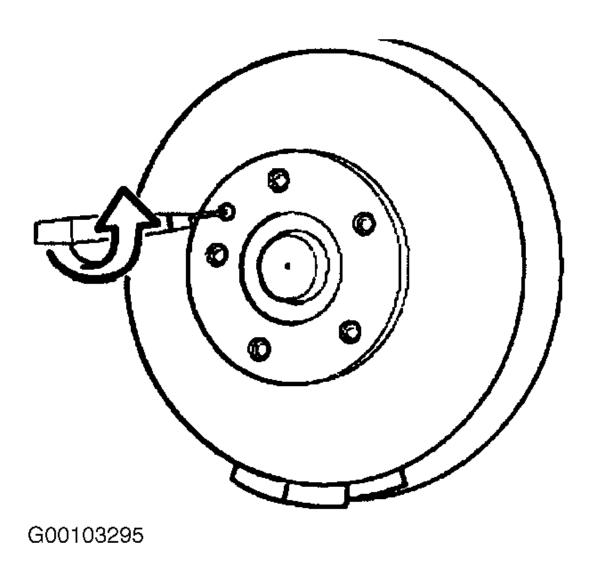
Removing Brake Disc Courtesy of BMW OF NORTH AMERICA, INC.
